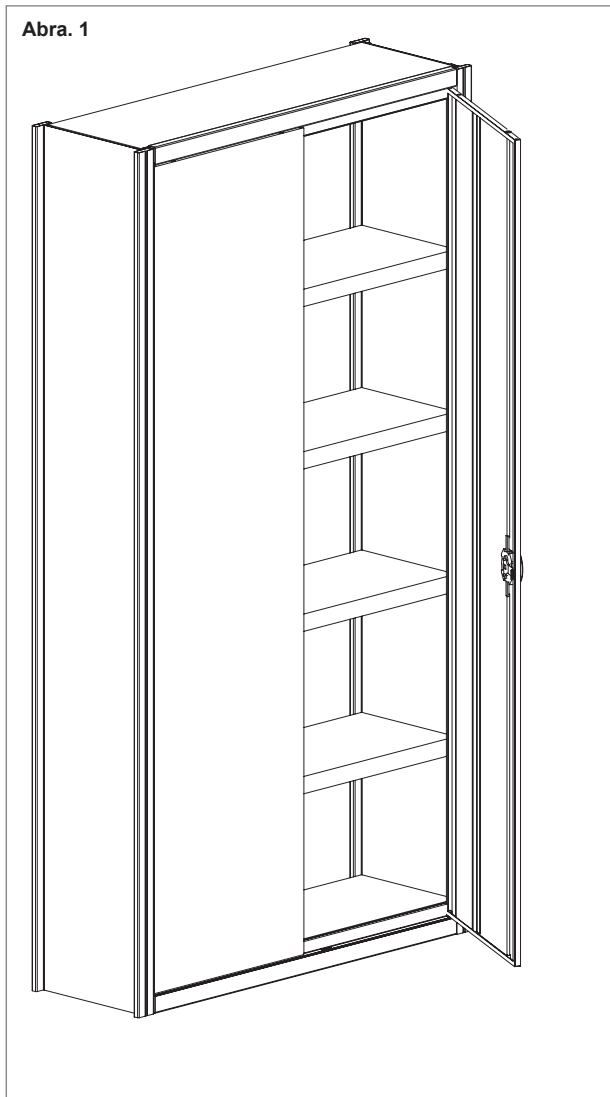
shows the shelving unit with a door, and sheet metal side walls or rear wall which can be ordered as an optional extra.
